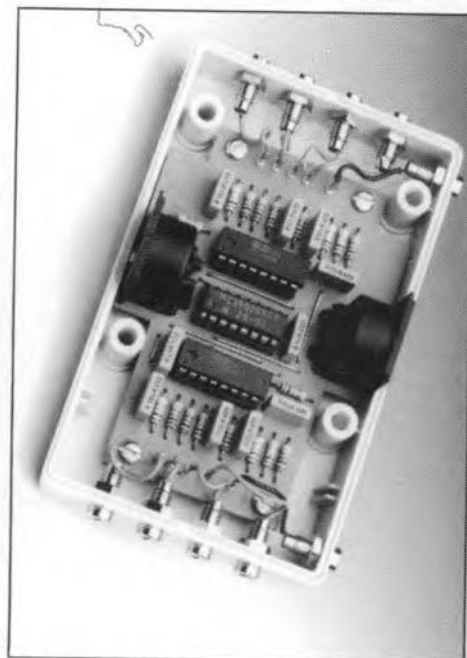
The finished board fitted in the specified enclosure; note the cut-away corners.
